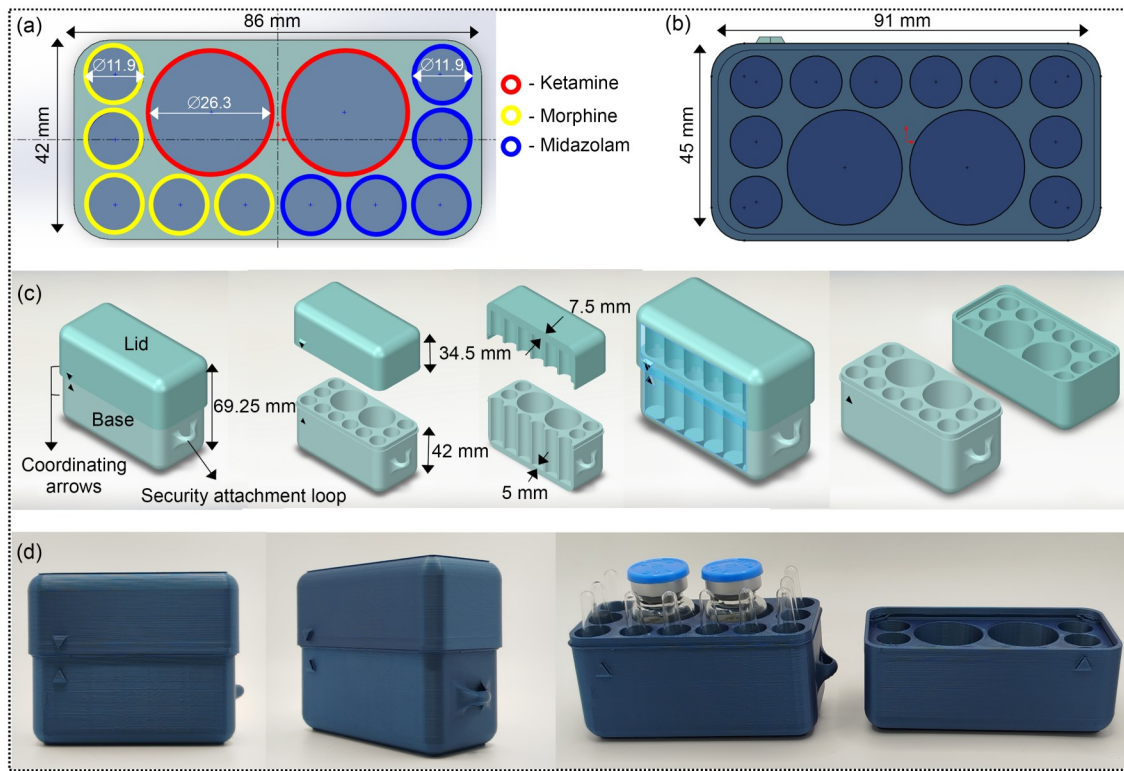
Prototype 2 design and fabrication. (a) Top view of the case base shows the ampoule configuration. (b) Top view of the lid highlights slots designed to secure ampoule heads. (c) Complete case design with labeled dimensions for clarity. (d) 3D-printed Prototype 2 fabricated using PLA+
